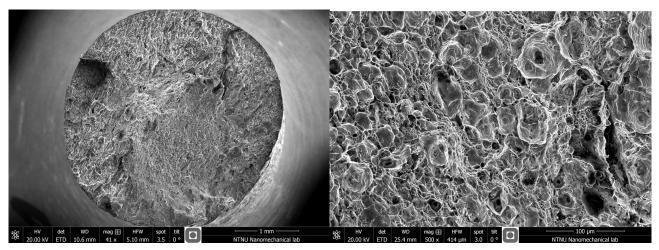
Images showing the fracture surface of the reference specimen for material A.
